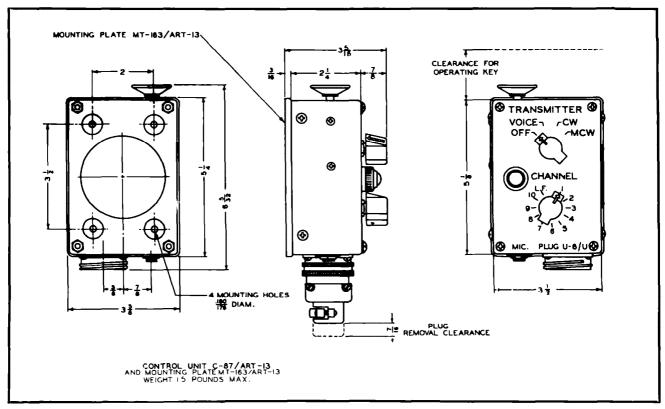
Control Unit C-87/ART-13 (Navy Type -23330)—Outline Dimensions
